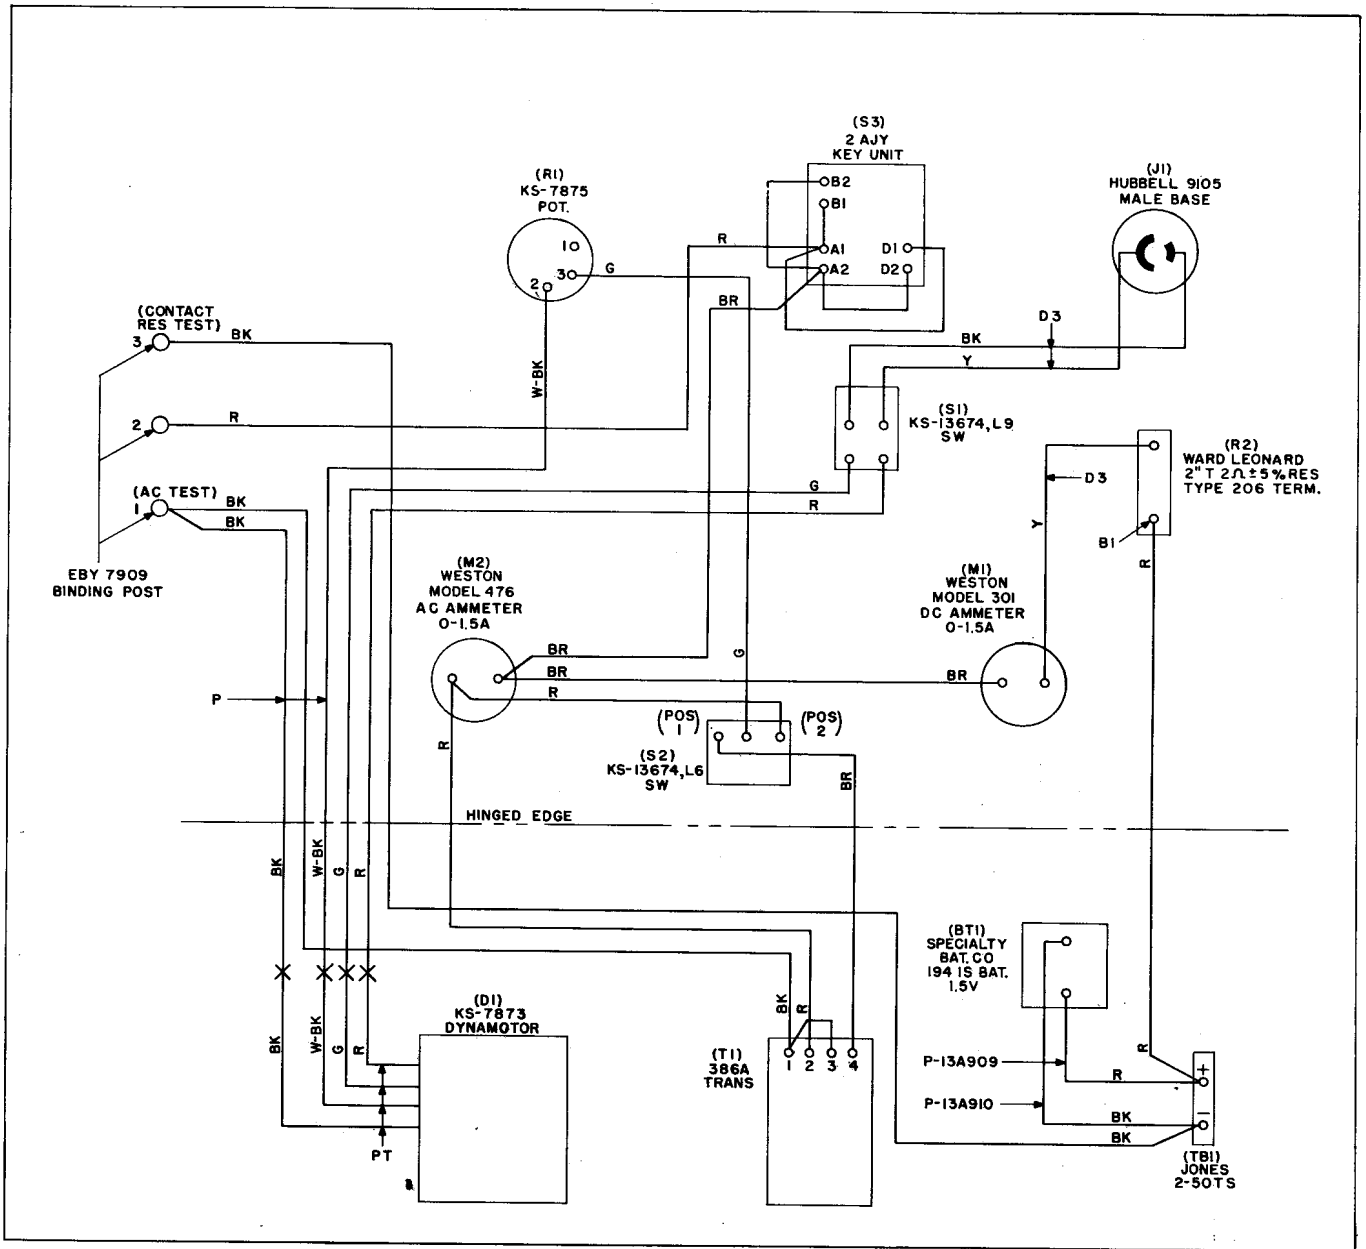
Typical Point-to-Point (Full Line) Method Wiring Diagram
